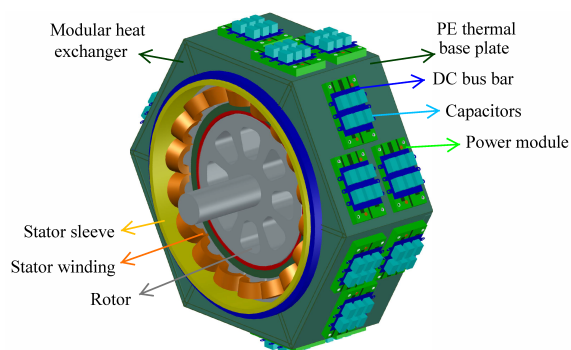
Integrated motor drive concept with six modular inverters mounted around the motor. Each inverter drives a set of three-phase winding [148], [149].
